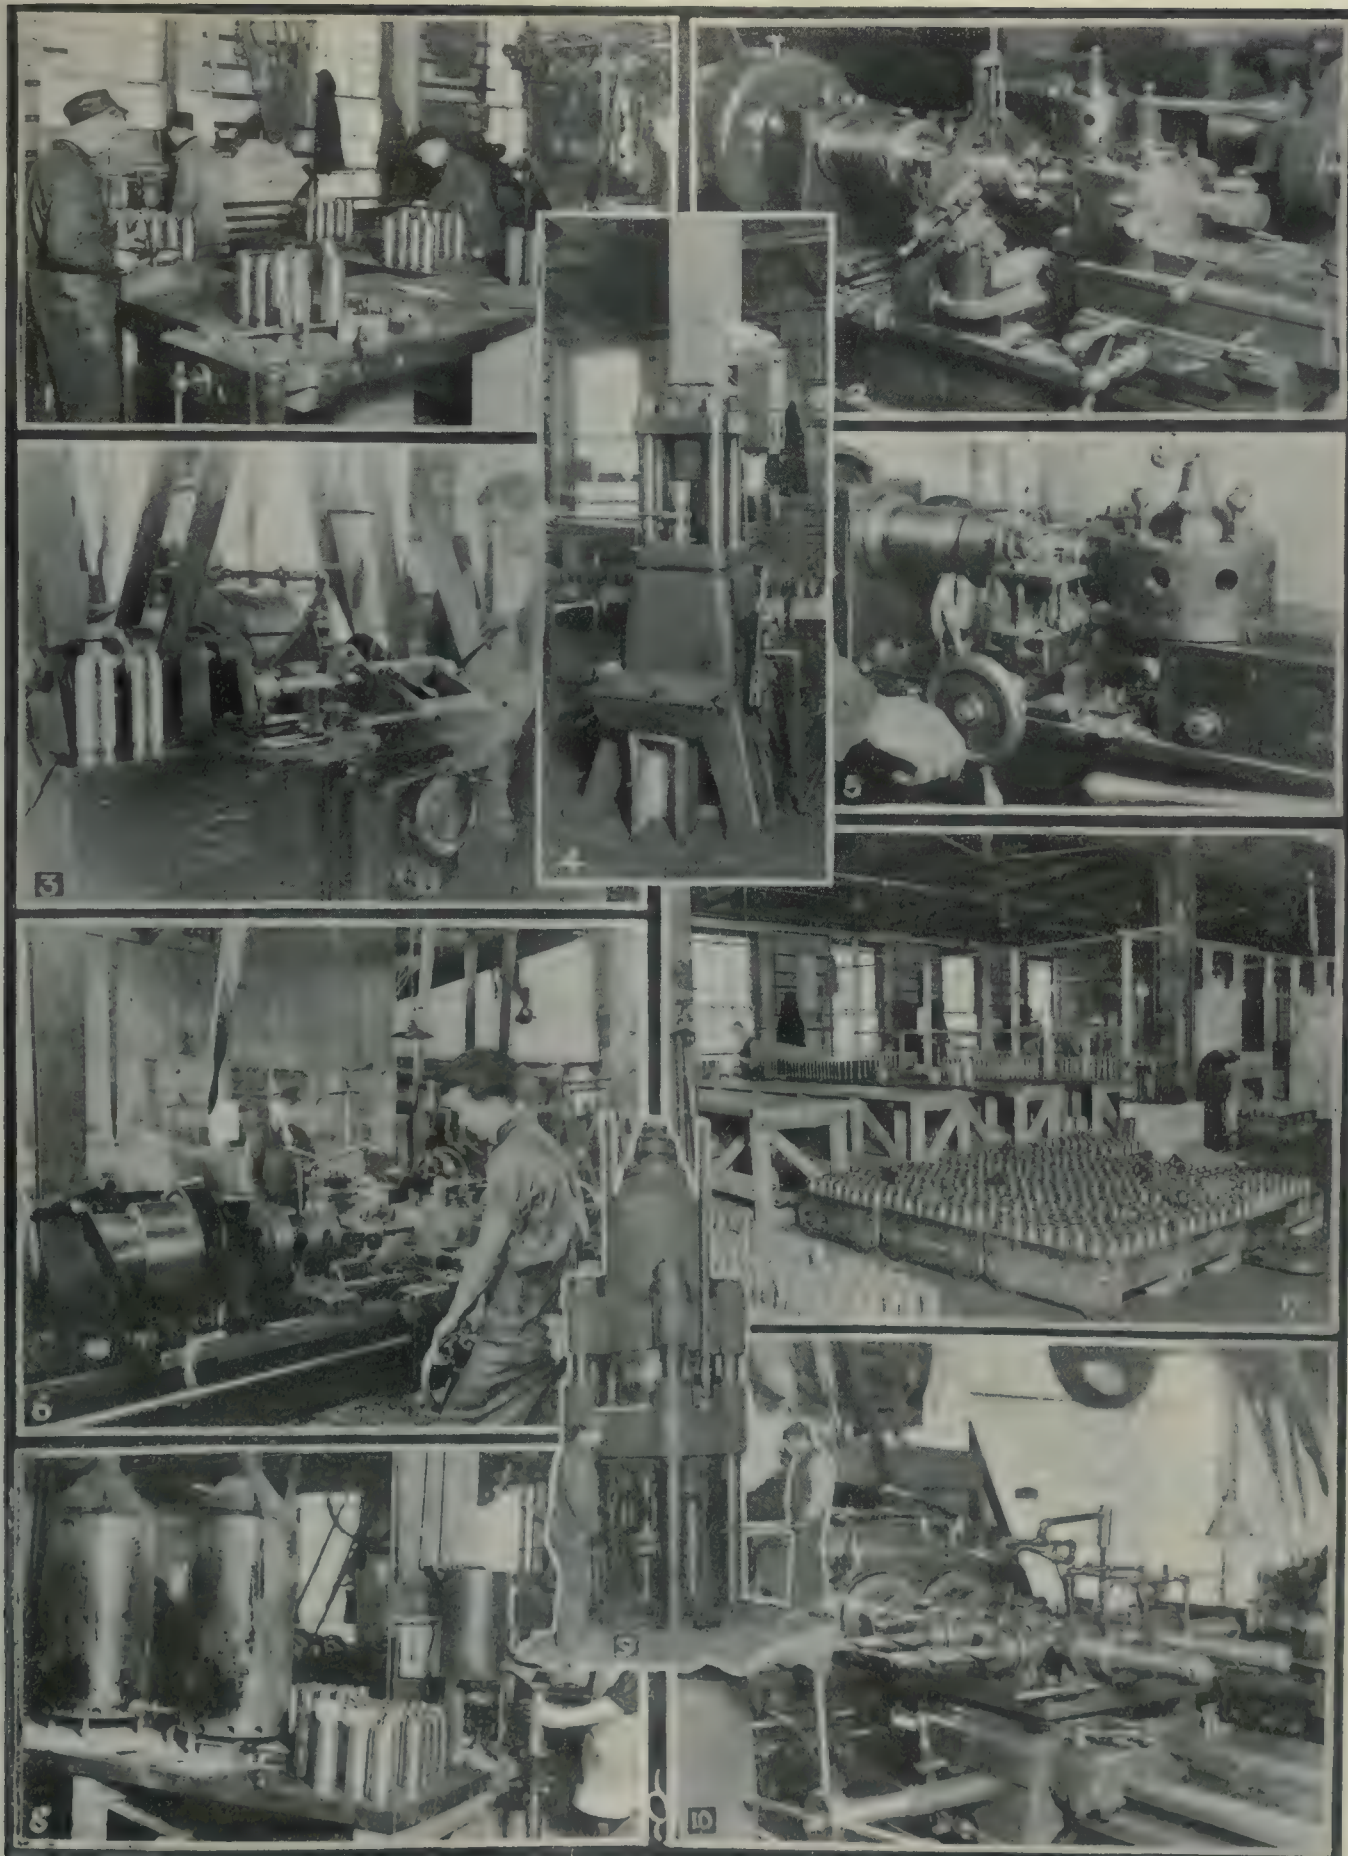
Final assembling department operations. (2)—Finishing brass sockets on a Warner & Swasey brass turning lathe. (3)—Finishing inside of shell nose, collapsible tap just entering (C.M.C. turret lathe). (4)—Goldie & McCulloch nosing press. (5)—Turning copper rifling bands on a standard turret lathe. (6)—Grinding shell bodies to a finished diameter. (7)—Painting department and Government inspection in distance. (8)—Filling shells with shot and resin. (9)—350 ton R. D. Wood shell forging press. (10)—Boring shells on a two-spindle Jones & Lamson turret lathe.
